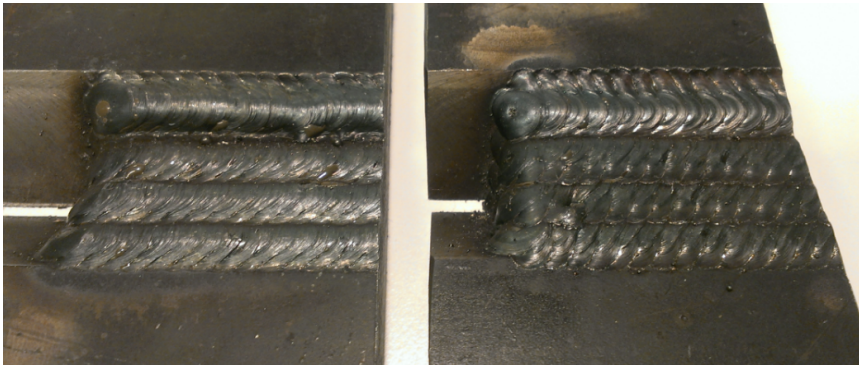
Butt joint type III: 3-1 and 3-2 weld face
